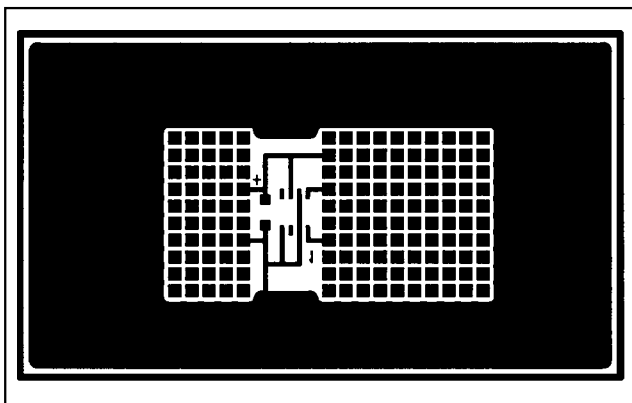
MAX845 EV Kit PC Board Layout—Solder Side
